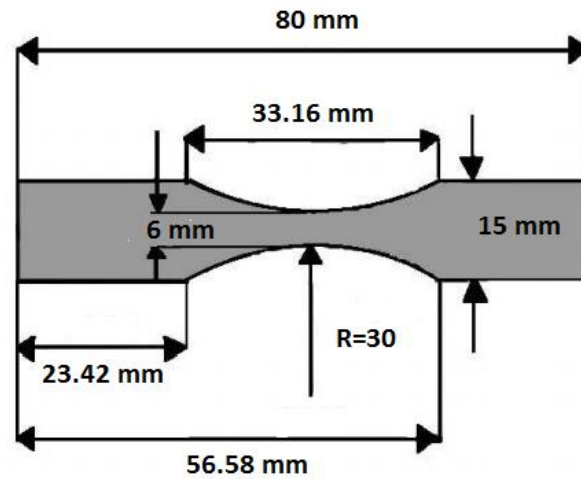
Fatigue specimen geometry (3 mm thickness) in accordance to ASTM E466. The specimens have a rectangular cross section and a continuous radius between the ends.
